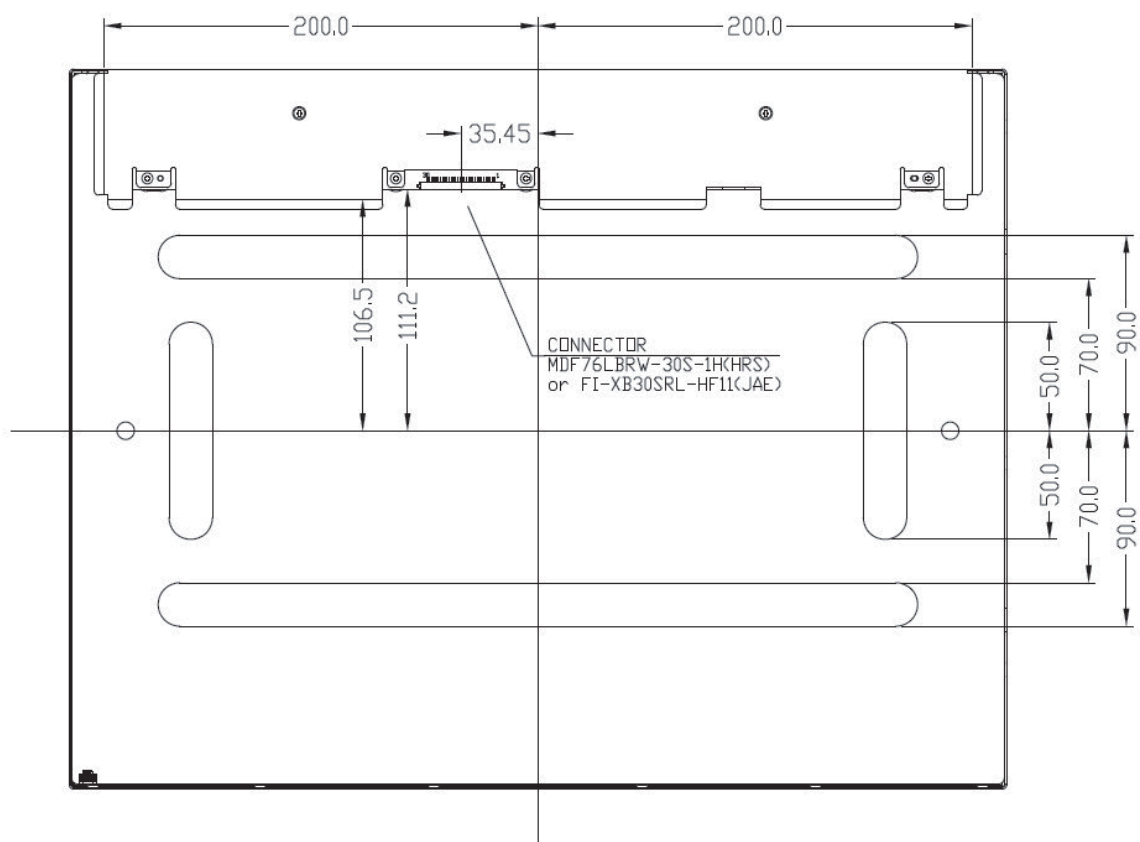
Moudule Outline Dimension (rear view unit:mm)
